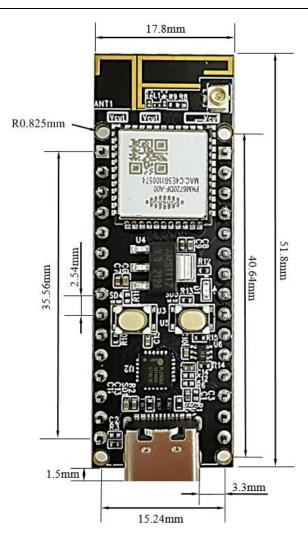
PKE8720DF-A00-F10 Board Dimensions
